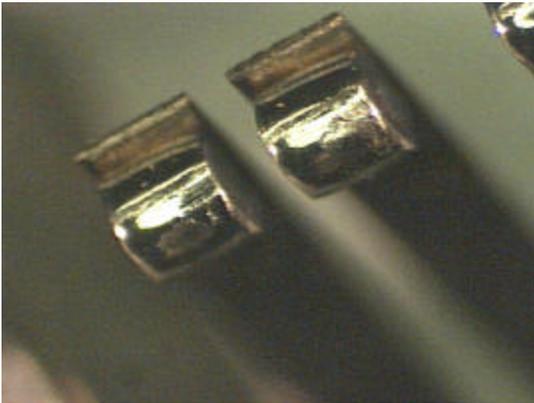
Example of a bifurcated contact design using two mechanically independent arms with a Paliney 6 button welded to the tip of each arm.
